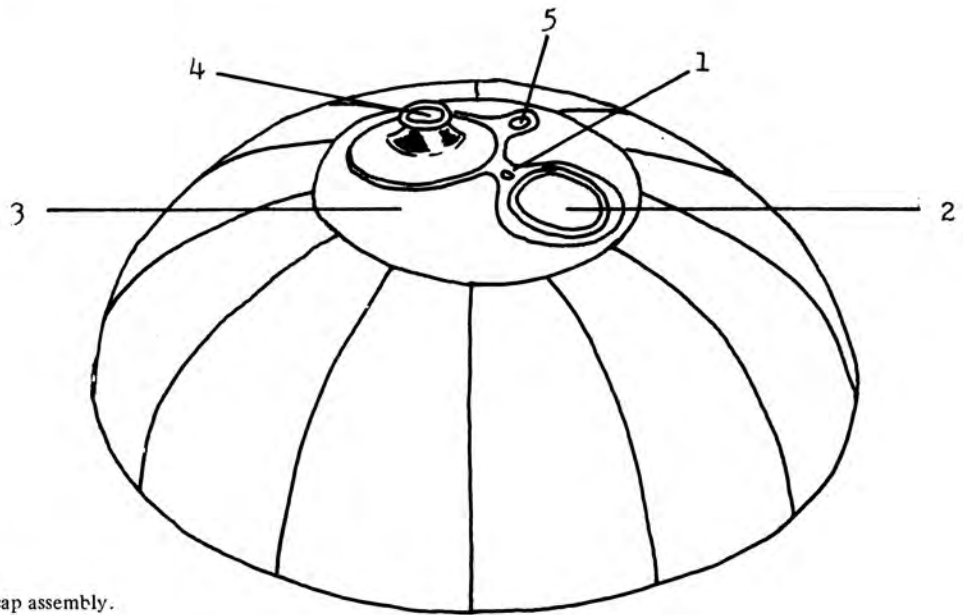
LO₂ Tank aft dome and end-cap assembly.
